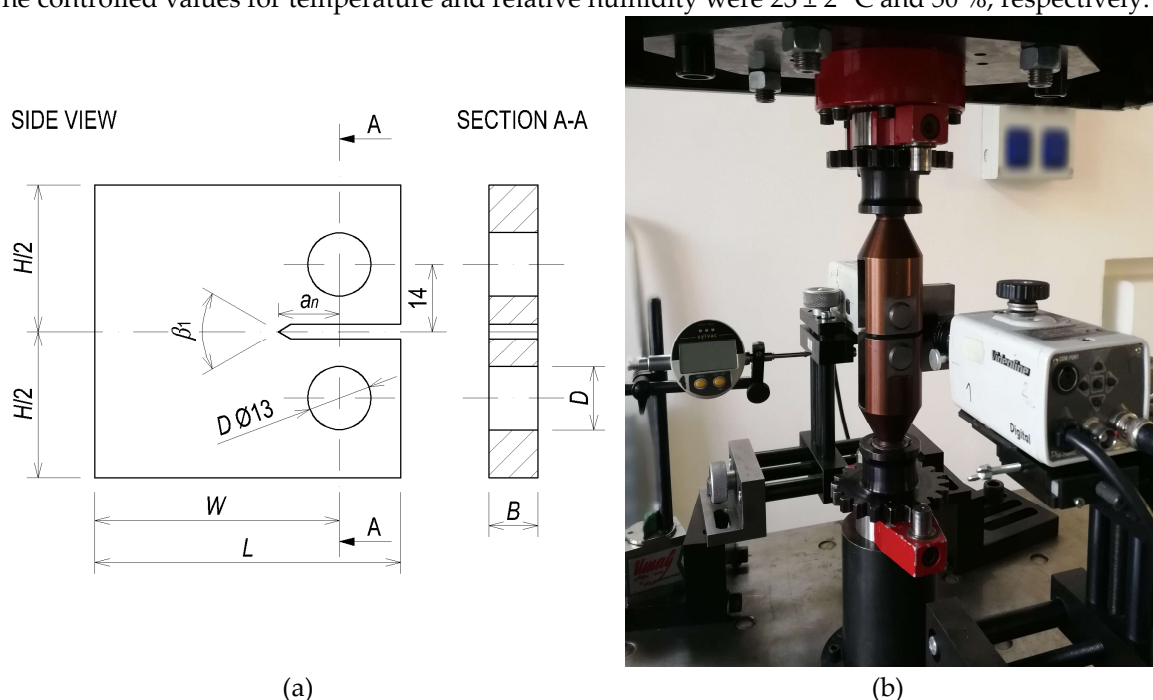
CT test specimen – geometry (a) and actual test setup (b).
